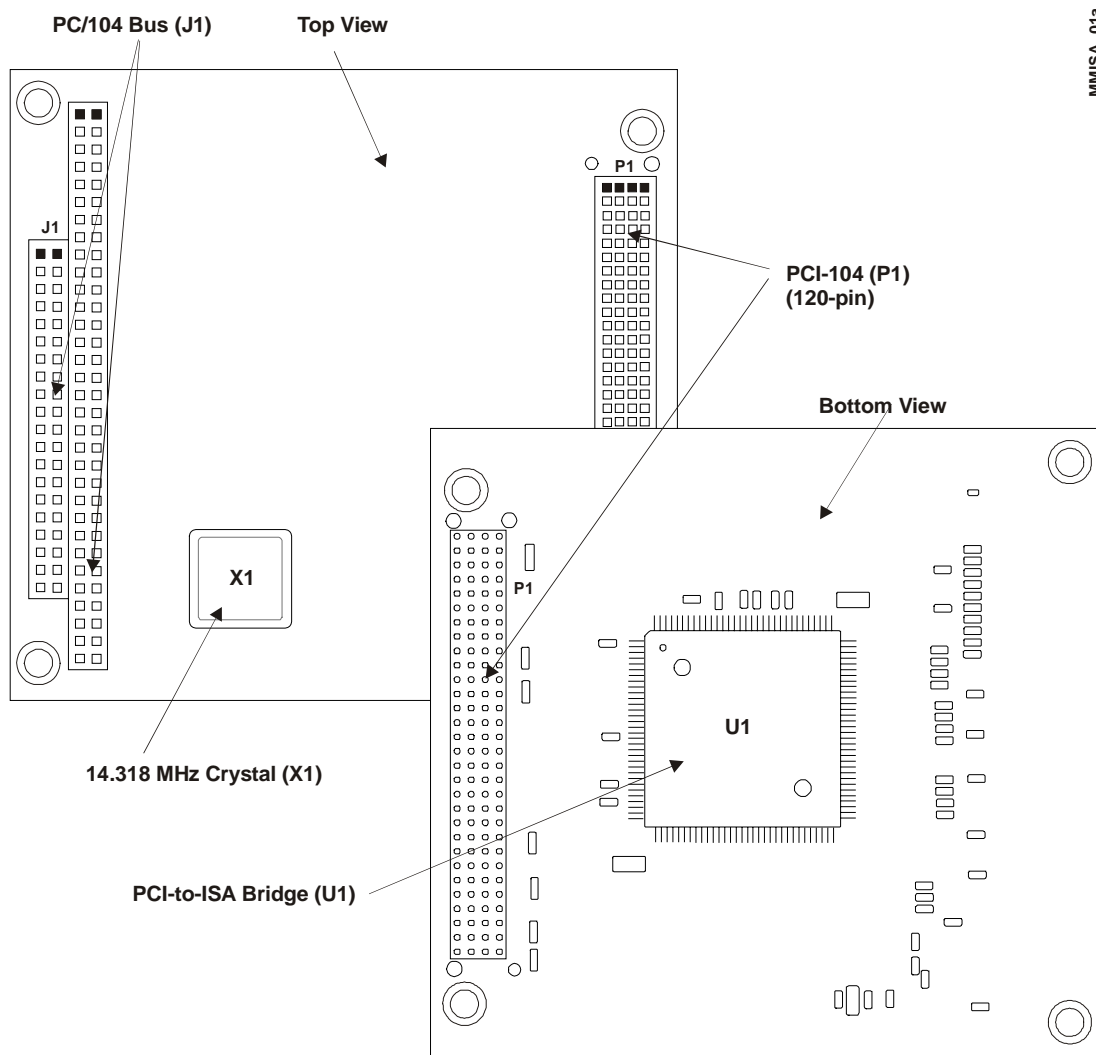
MiniModule ISA Expansion Board (Top/Bottom view)
